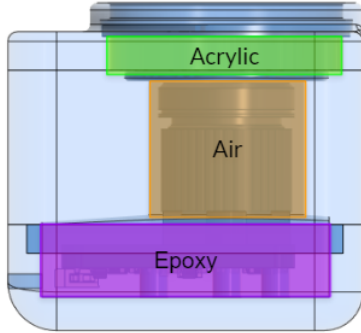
A side view of the internals of the camera housing. The colored sections show the internal material contained in that section.
